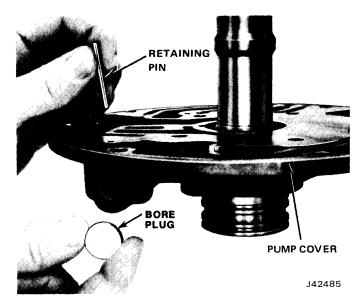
Pressure Regulator Plug and Retaining Pin
